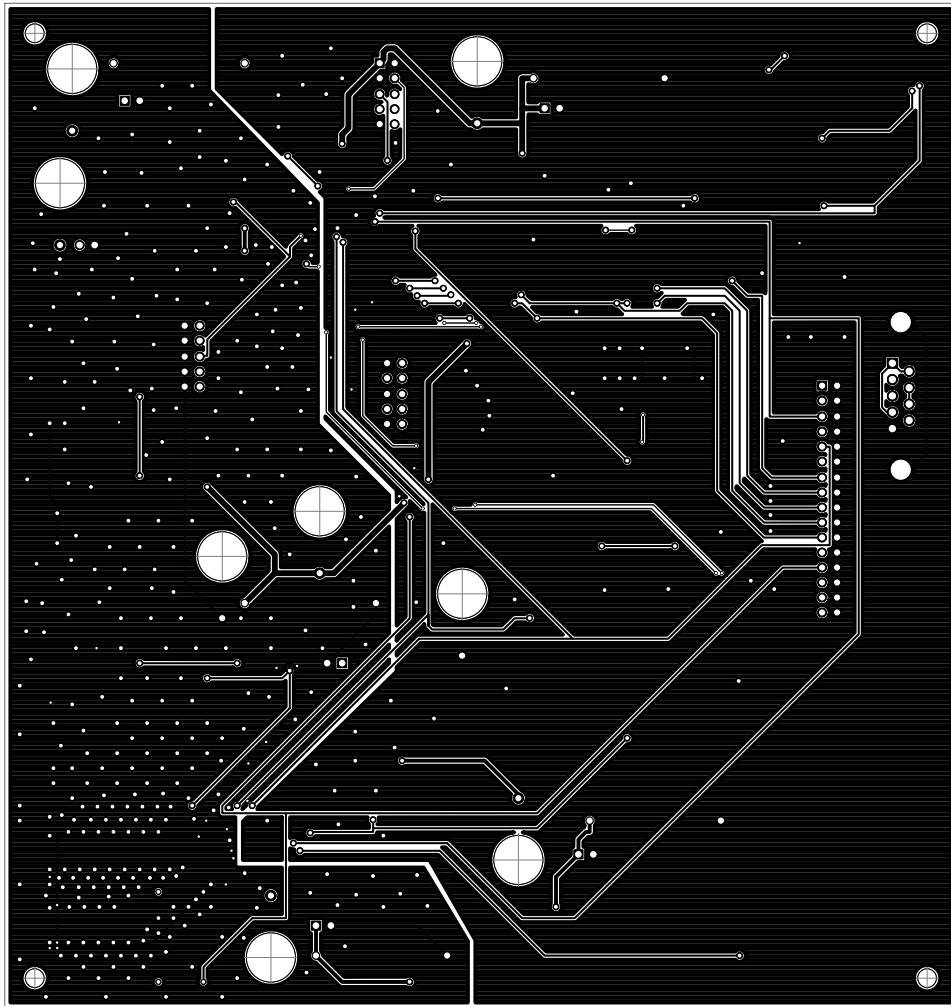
PCB diagram of PLL Board indicating bottom-side copper, including ground planes.
